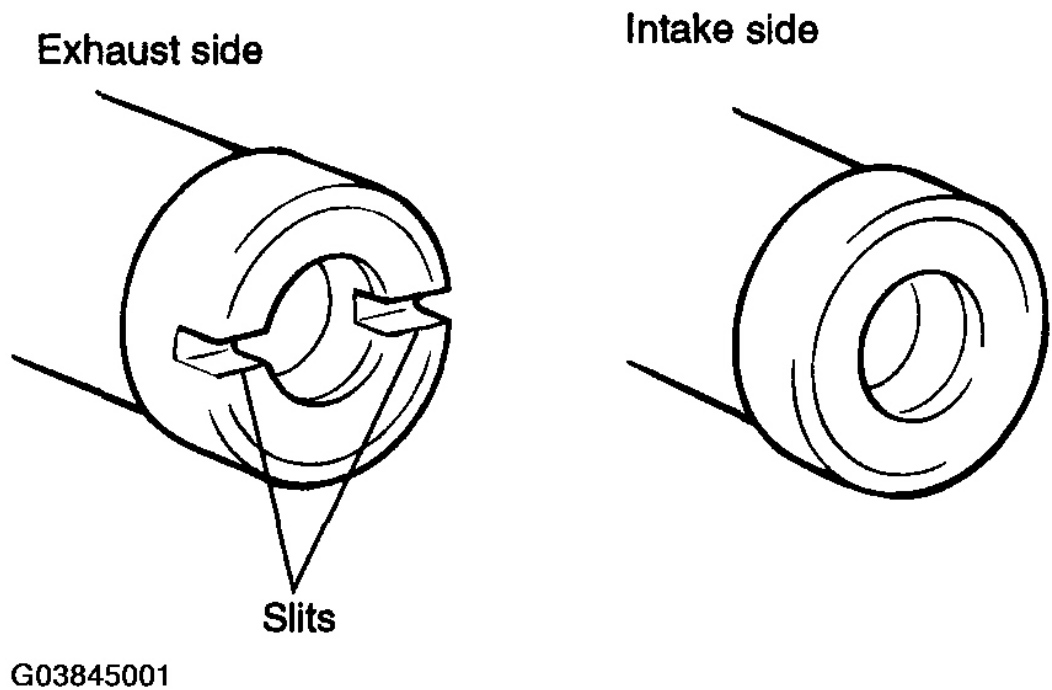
Identifying Exhaust And Intake Side Of Camshaft
